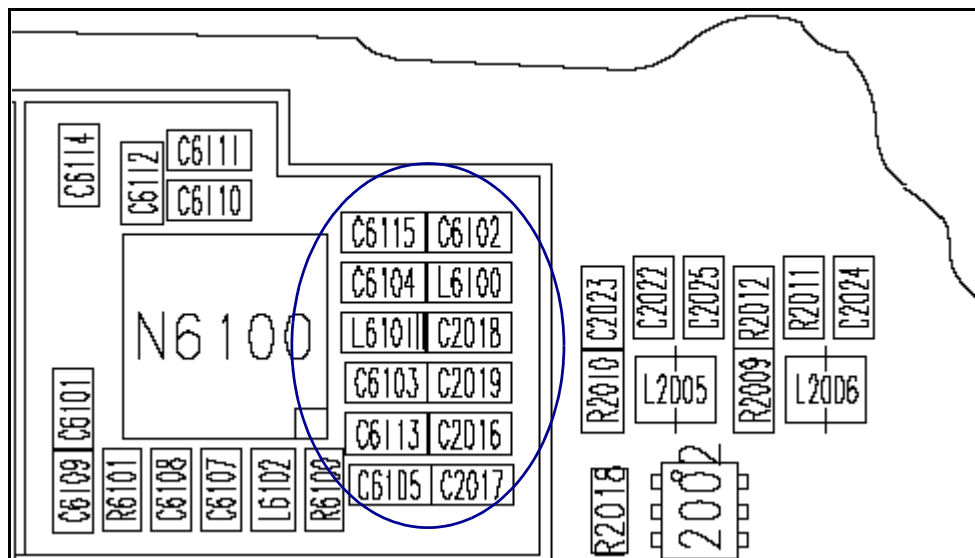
Matching chips for the Pop-port connector on the top PWB component layout
